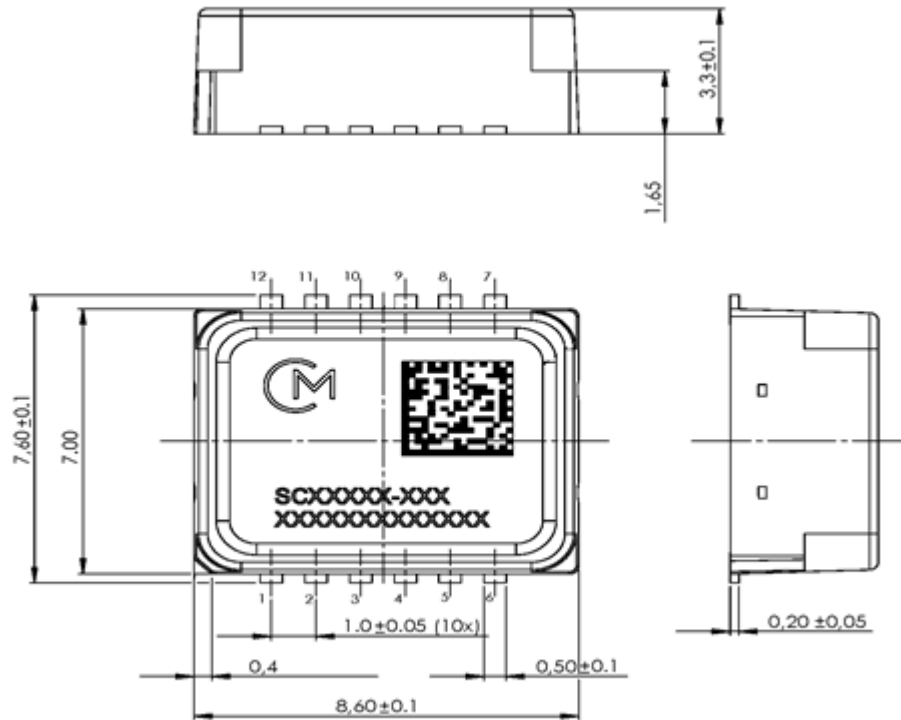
Package outline. The tolerances are according to ISO2768-f (see Table 9).
